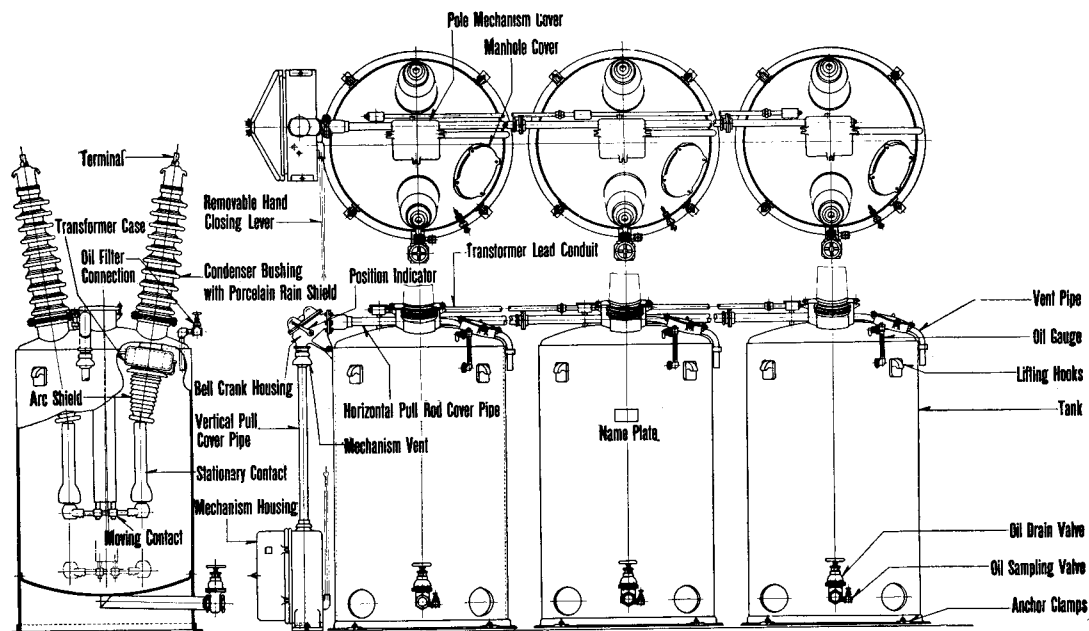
TYPE G-22—132,000 VOLT OUTDOOR OIL CIRCUIT-BREAKER
